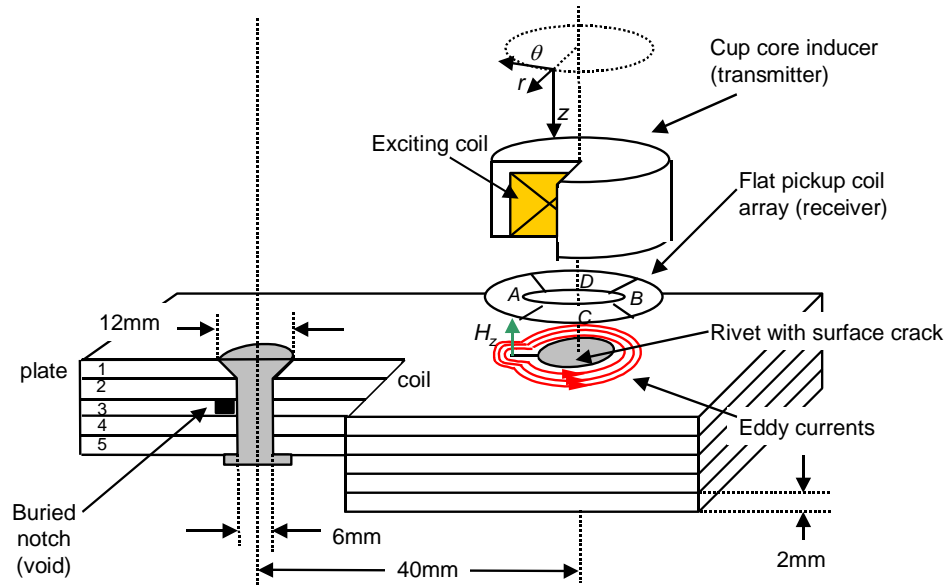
EC sensor configuration and inspected riveted lap joint
